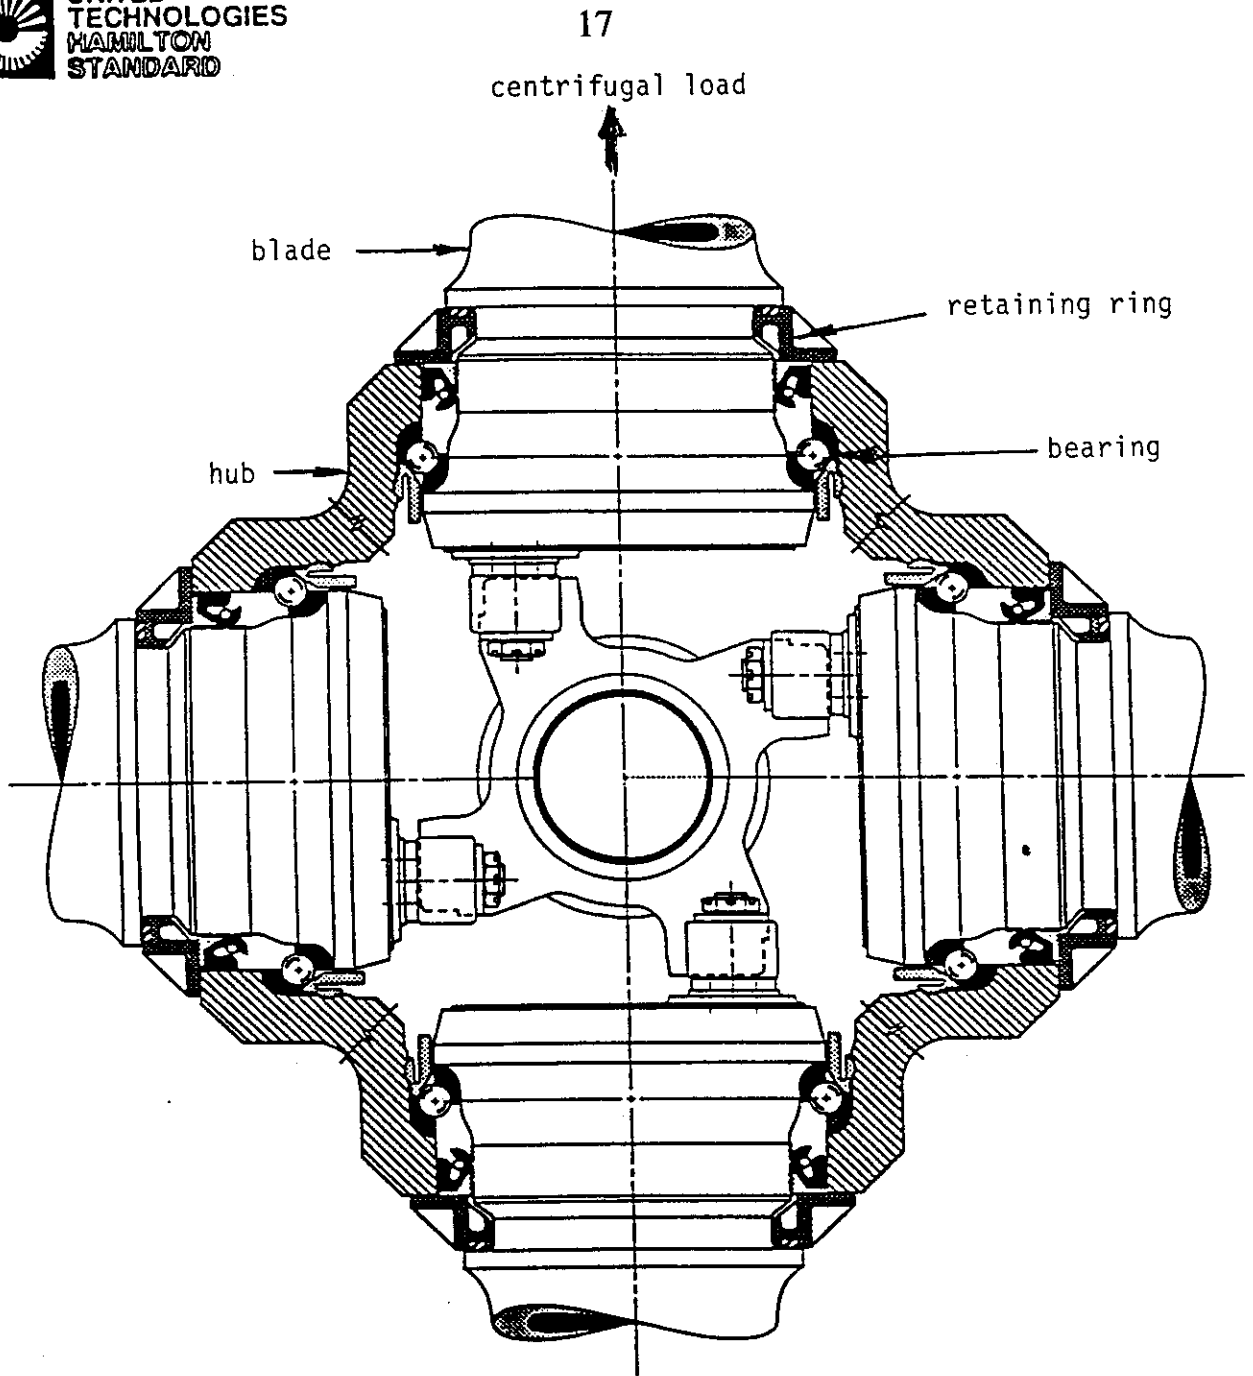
Hamilton Standard 14RF-9 Propeller Assembly
